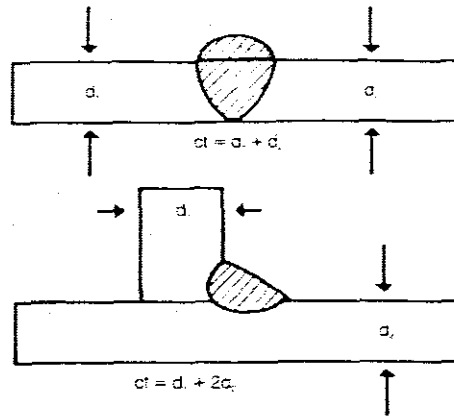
Depicting a Single Butt Joint and a T-Joint (from Afrox Welding Consumables Catalogue)
